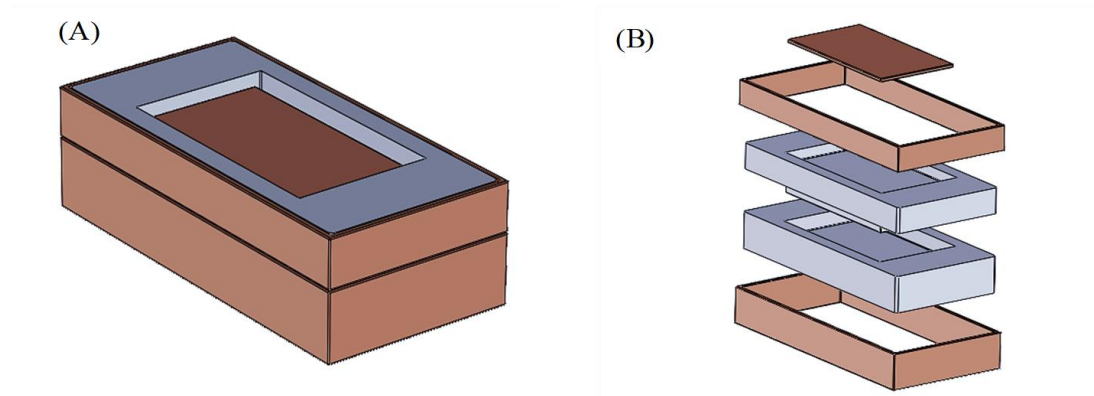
Heating system and metallic mold assembly developed to manufacture the thermoplastic commingled composites. (A) Metallic mold with heating system used to consolidate the materials. (B) Exploded view to show the assembly (adapted from [33]).
